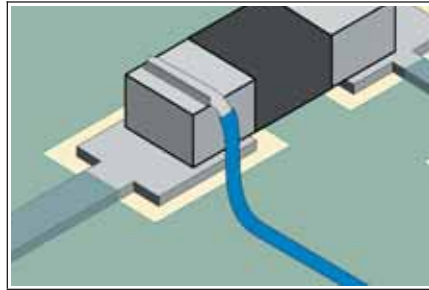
Not recommended Wire soldered parallel or perpendicular to component.
